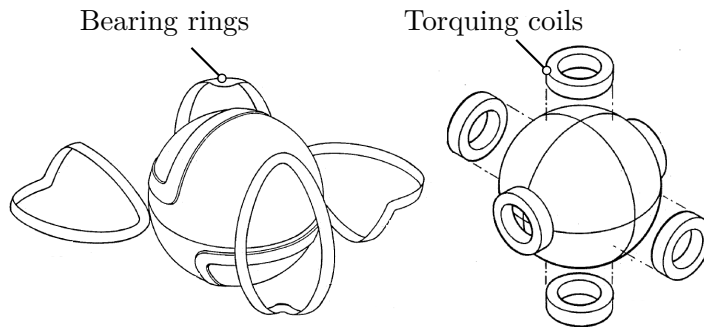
(Left) Schematic of reaction sphere with bearing rings proposed by Downer et al. (Right) Torquing coils. Drawing adapted from [21].
